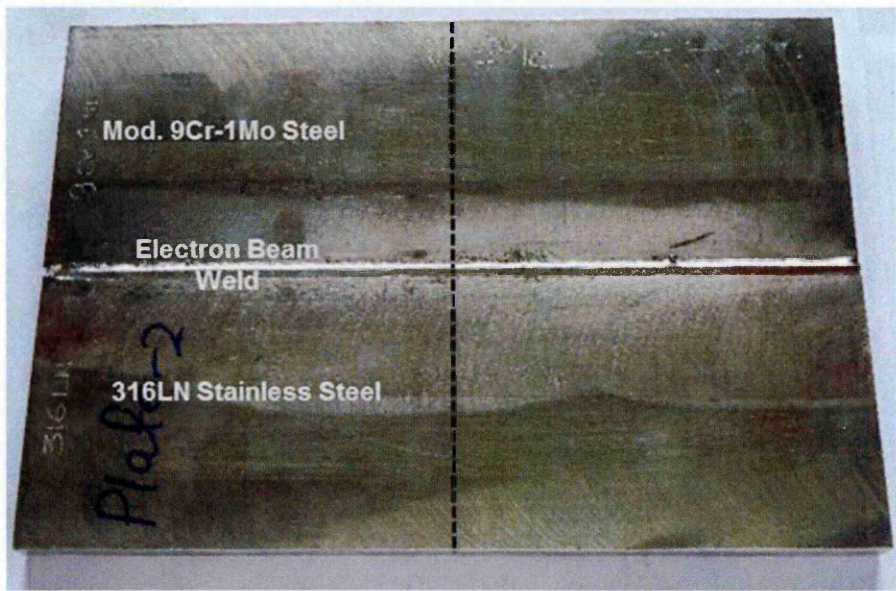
Photograph illustrates the P91:316LN EB welded plate.
